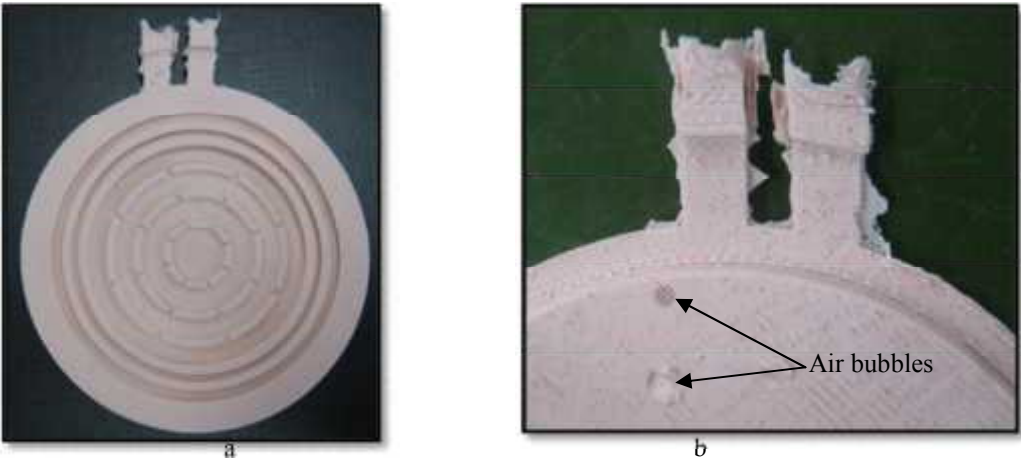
a) Upper VSD insert on mould prototype No 2; b) Flaws – air bubbles.
